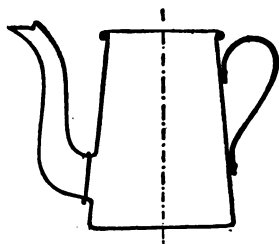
Method of applying a spout to a tea kettle by autogenous welding.
